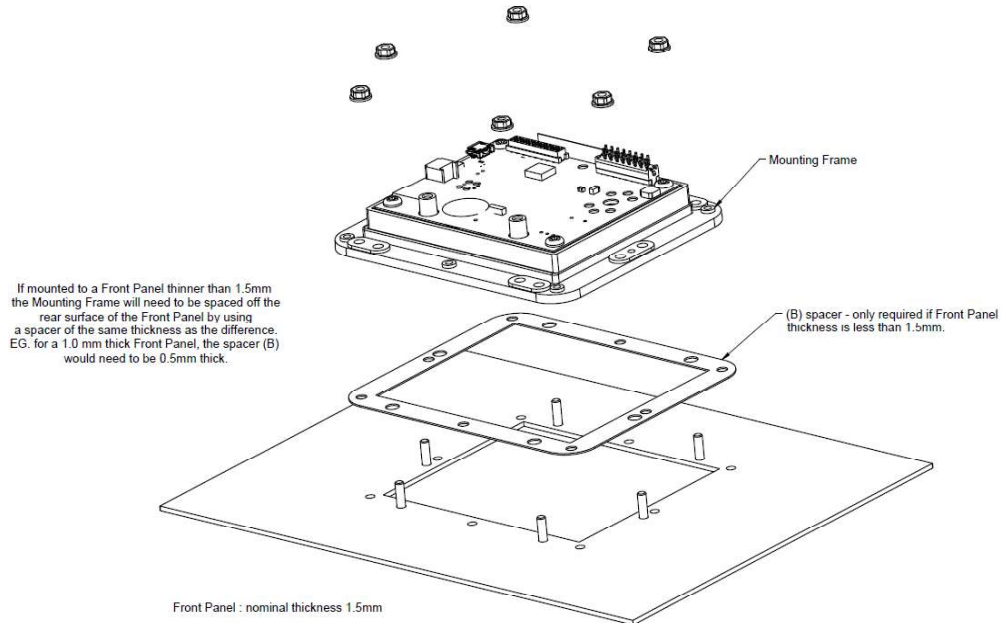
IDM2040-43A Panel Mount (Rear View)
